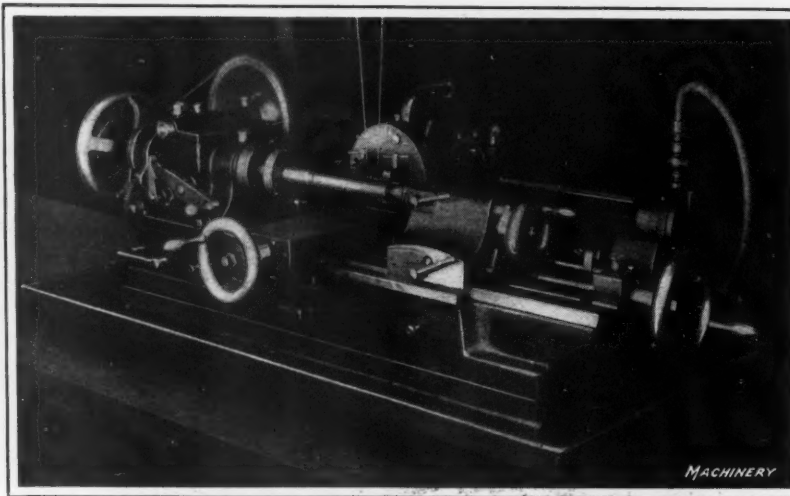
Precision Lathe equipped with Thread-milling Attachment which is utilized for lapping with a Rotary Lap
